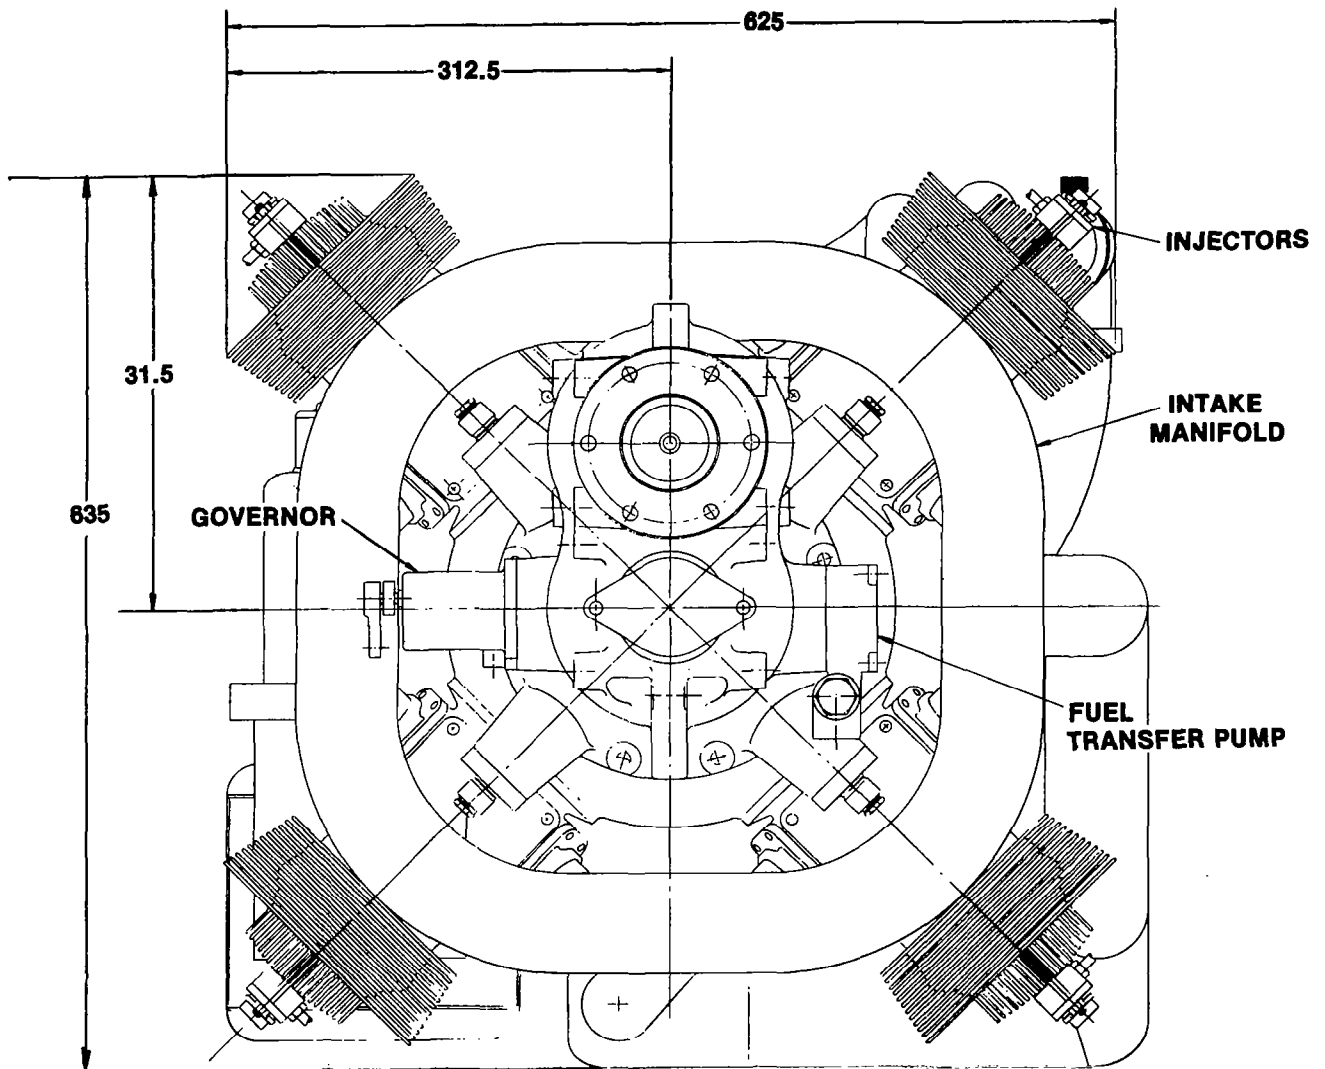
186 kW AIRCRAFT DIESEL FRONT VIEW
